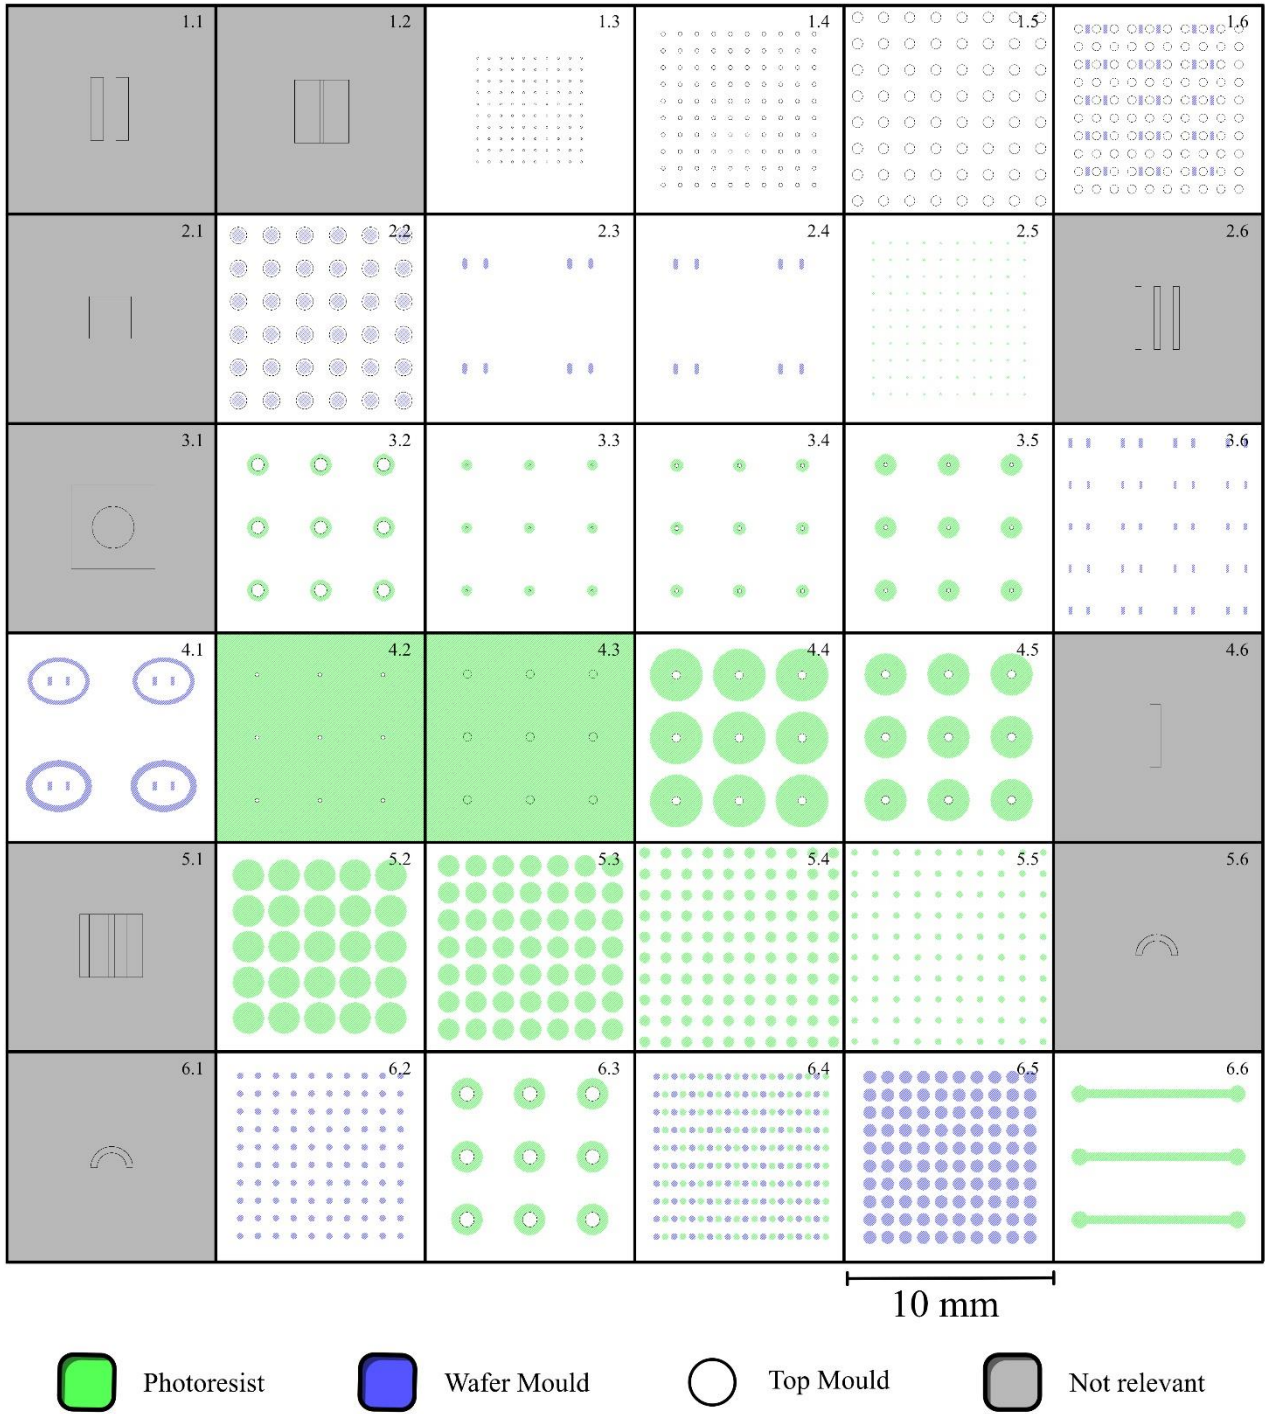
Schematic combined design of 3 moulds used in the injection moulding experiment. Top mould, photoresist mould and wafer mould. The wafer mould and photoresist mould are in actuality not used at the same time.
